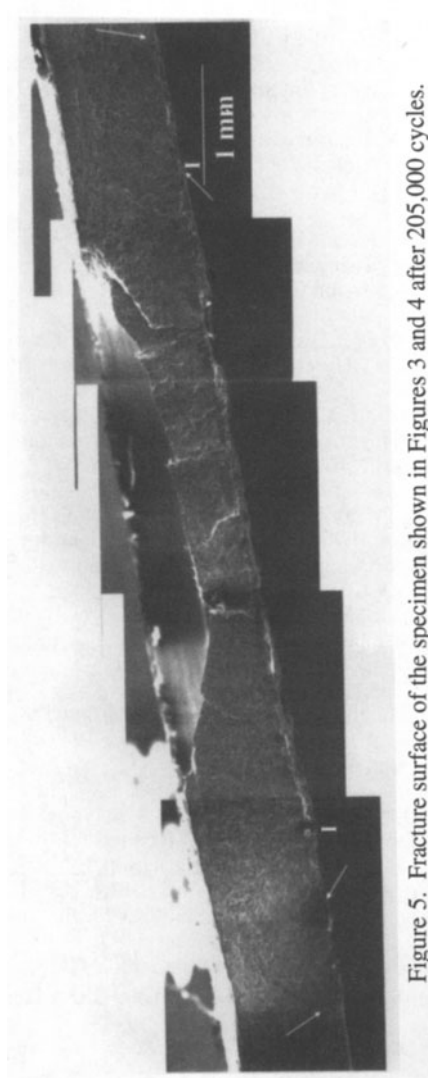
Fracture surface of the specimen shown in Figures 3 and 4 after 205,000 cycles.
